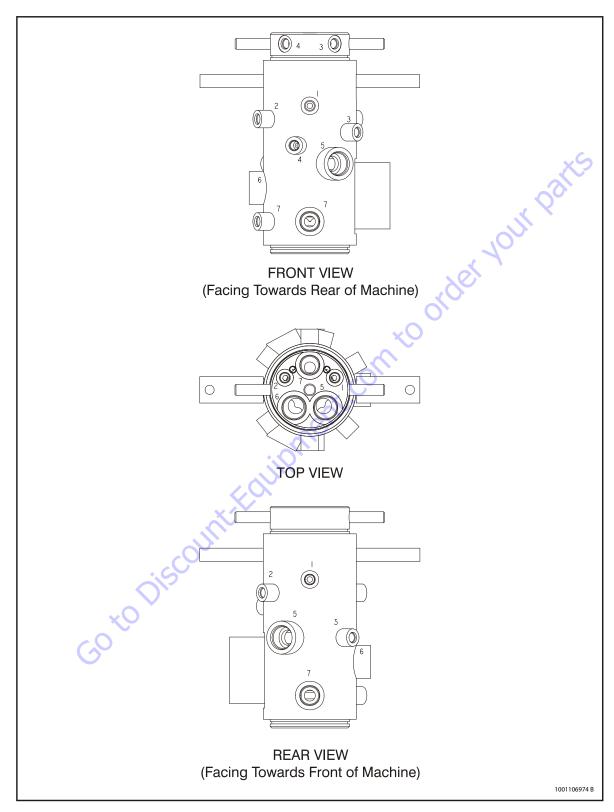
Rotary Coupling (7 Port) - 2WS (USA Built Machines, SN 0300138729 through 0300171769 and China Built Machines, SN B300000100 through B300000969)
